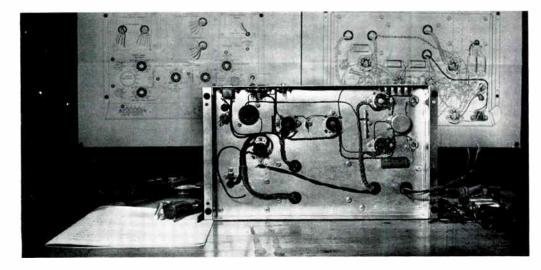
, above: At the end of the first 17 assembly steps, devoted entirely to mounting parts, the chassis looked like this
